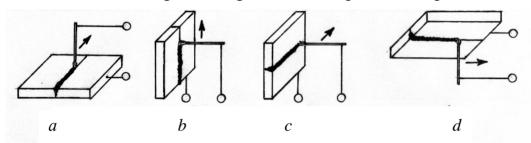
Possible spatial positions for welding: a – flat; b – vertical; c – horizontal; d – overhead
